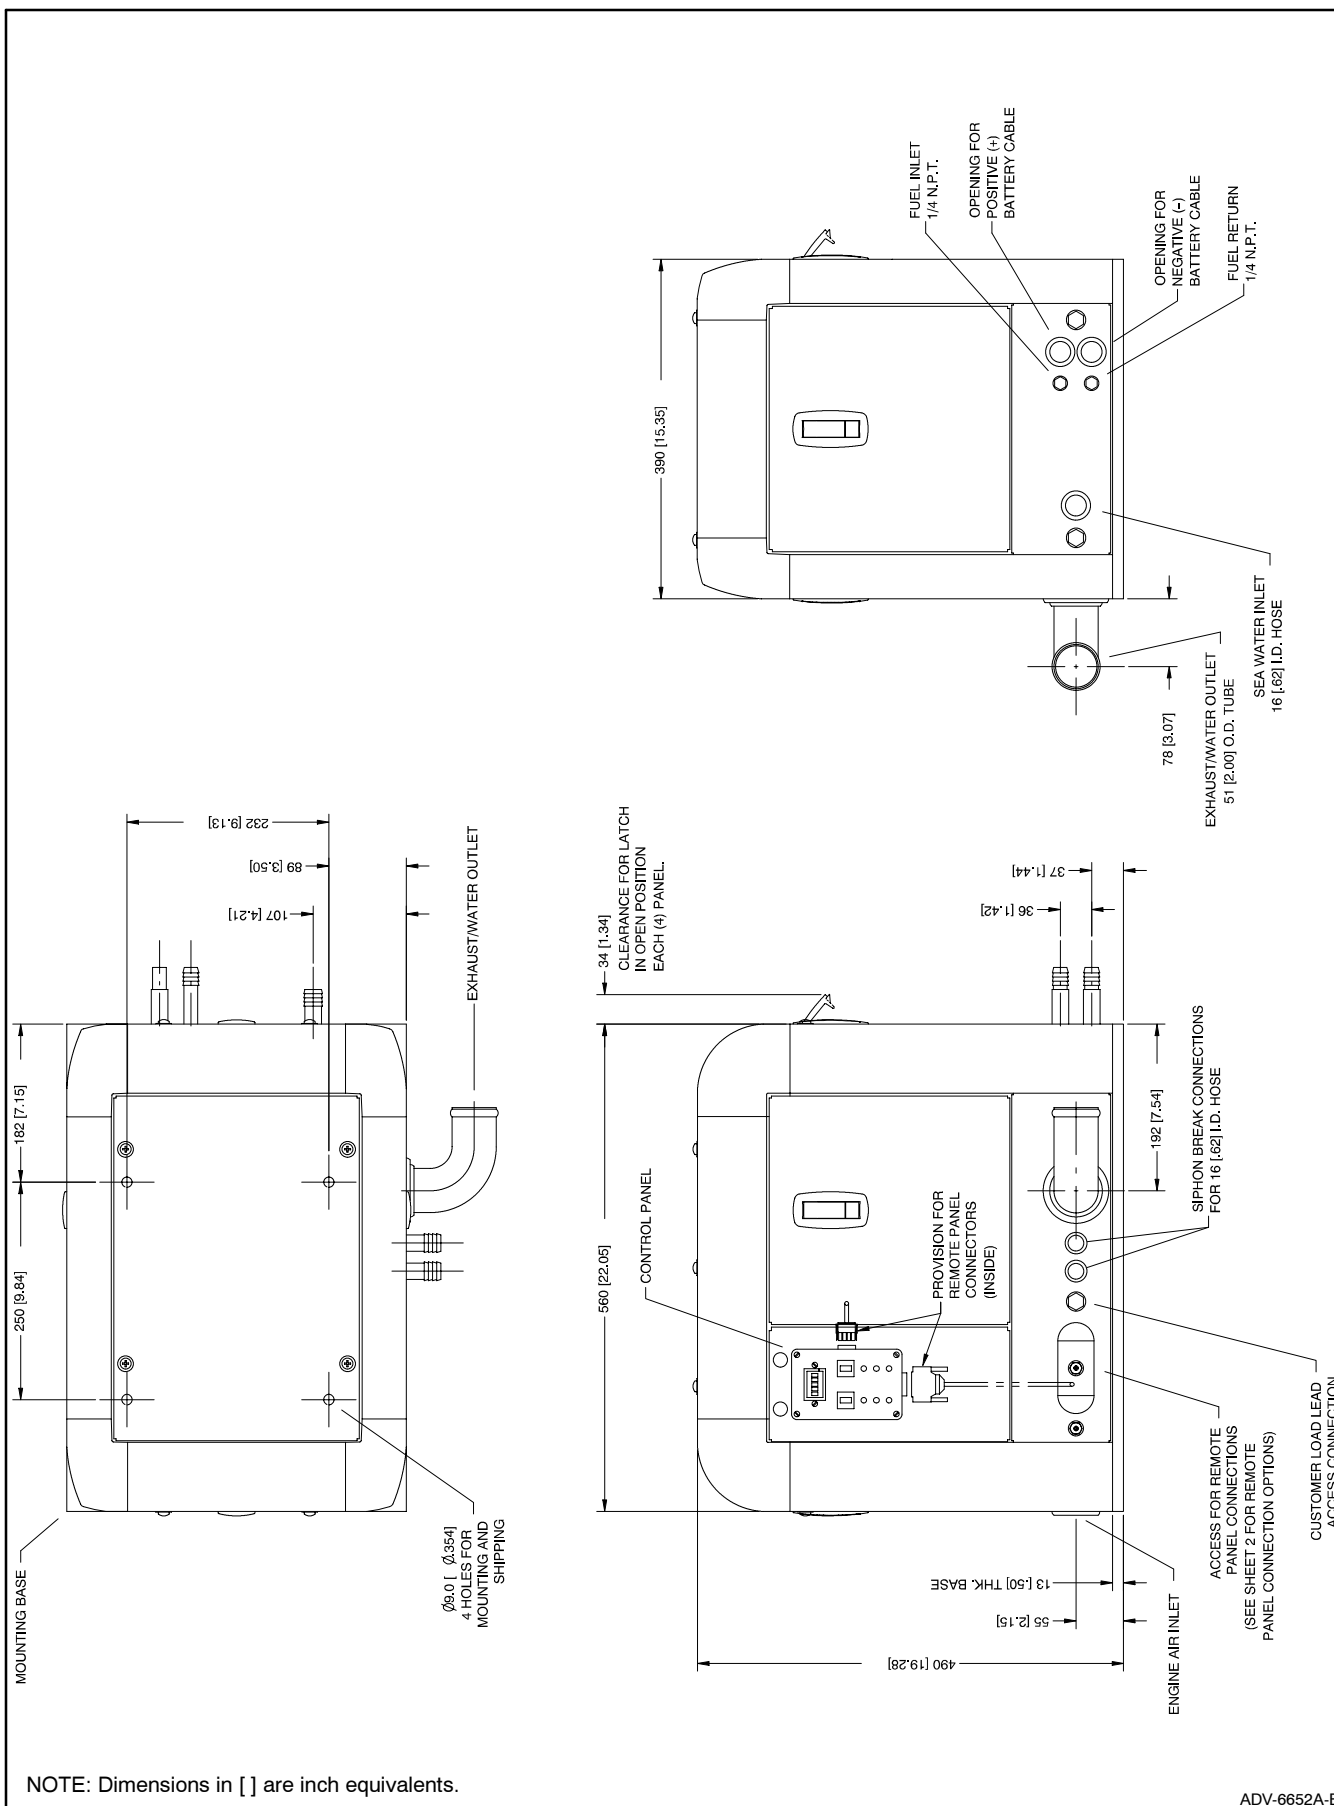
Dimension Drawing, 3.5EFOZ/4EOZ
